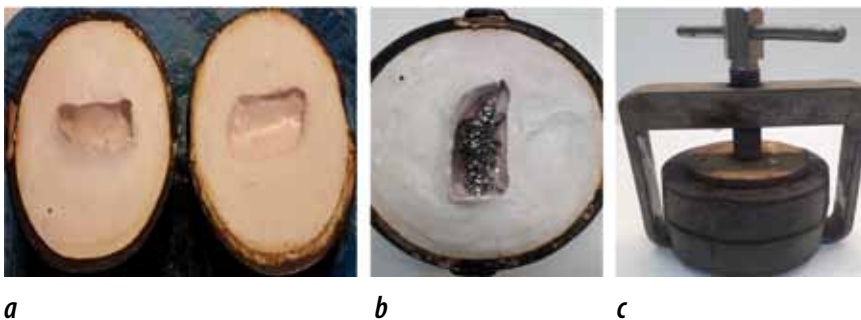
Mold for the stage of cold pressing: a — finished mold; b — the stage of laying the components of the bioengineering composition; c — stage of cold pressing
